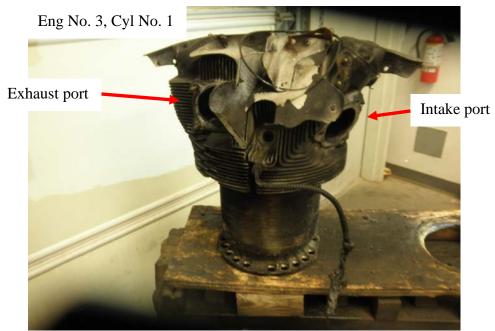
View of rear of No. 1 cylinder showing it was intact with the head in place and intact, and the intake and exhaust rocker arm covers were in place. The exhaust and intake ports are identified.
